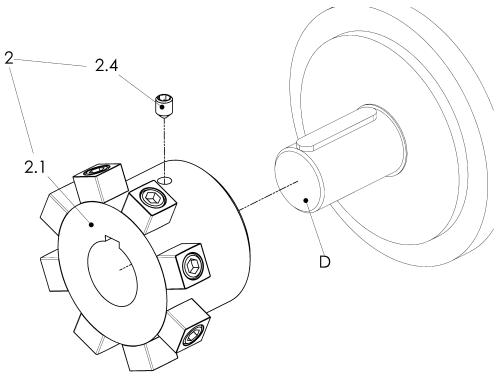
Mounting the hub spider (2) with cylindrical bore and keyway
